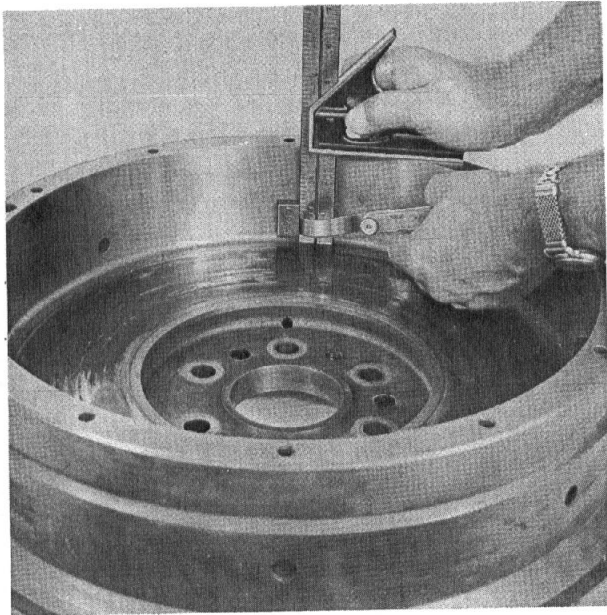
Aligning Drive Pins in Flywheel Using Machinist Square and Feeler Gauge.
